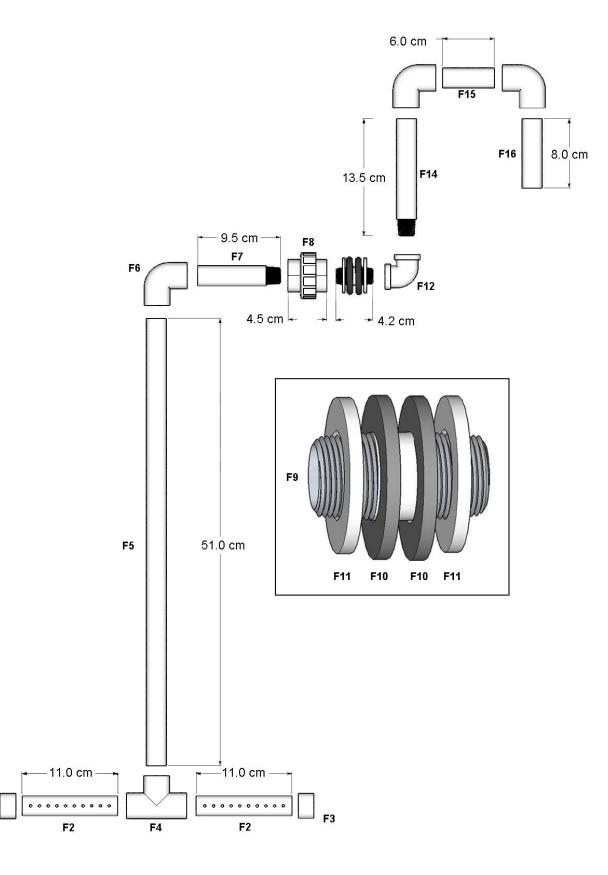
INTERIOR STANDPIPE AND OUTLET PIPE.
